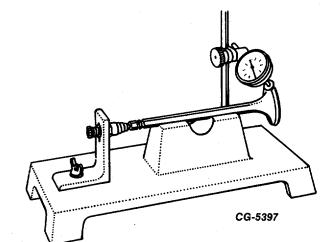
Checking Valve Stem Straightness and Face Run-Out
